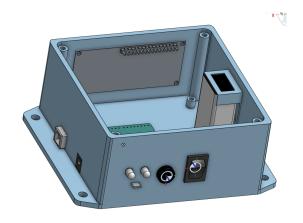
Shows the placement locations of the components in an isometric view of my CAD enclosure
